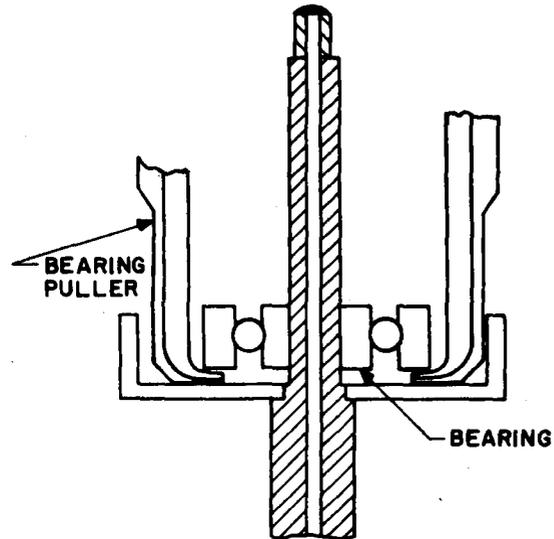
Cross Section Showing Use of Bearing Puller to Remove Bearing
